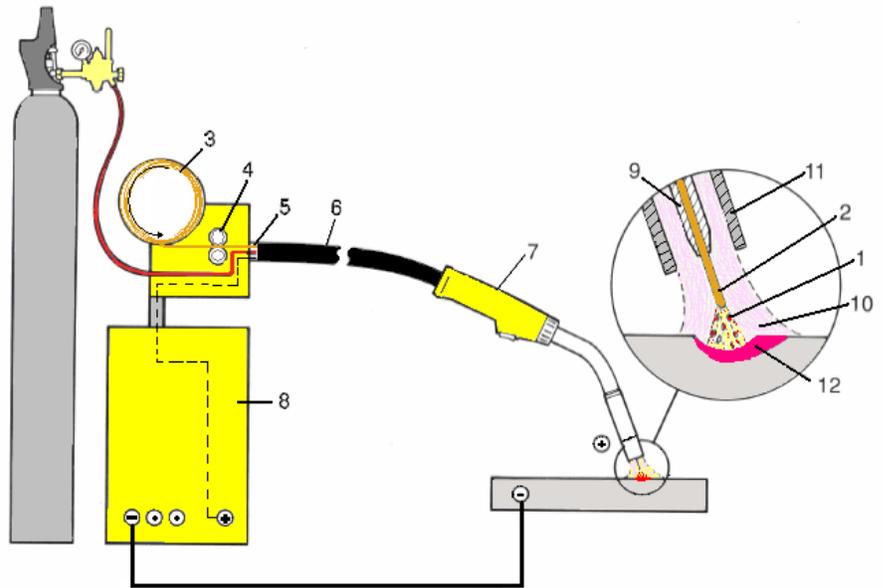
Illustration of MIG/MAG welding tools - Courtesy of ESAB AB
